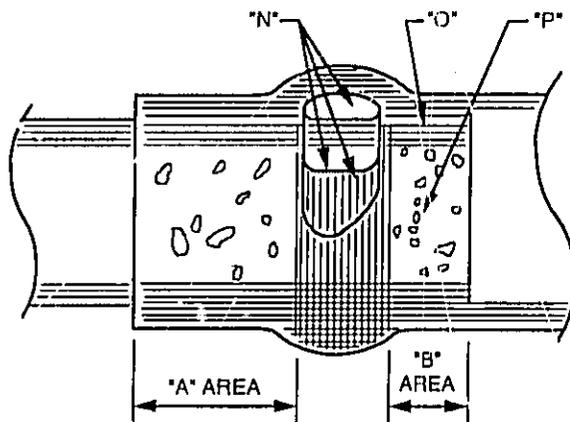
Radiographic Analysis of Brazed Joints (Sheet 2 of 4)
